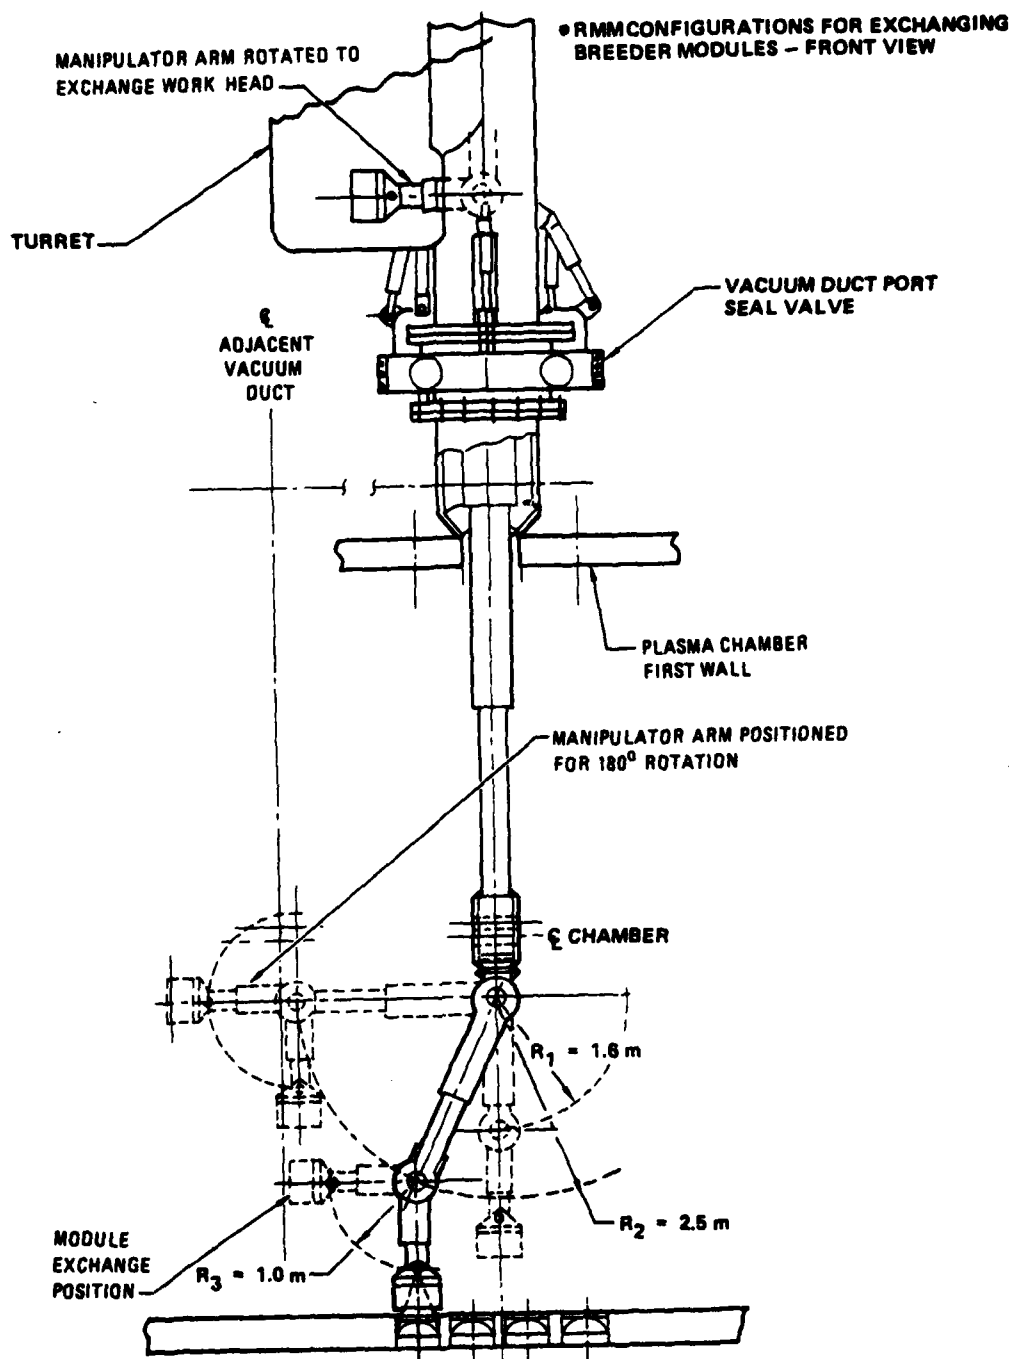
Remote Maintenance Machine (front view).⁵⁴
